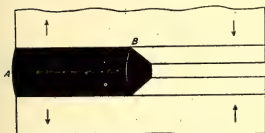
STRAINS PRODUCED BY COOLING OF THE METAL IN THE WELD
